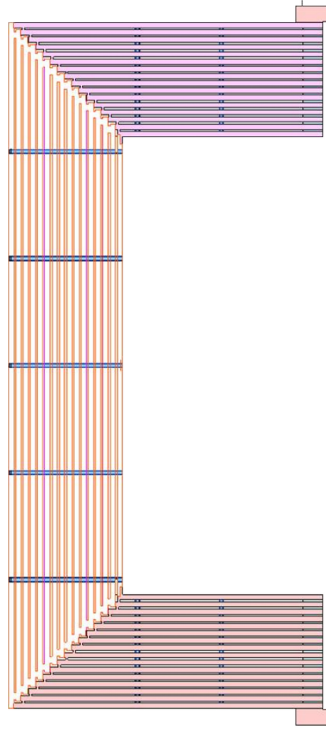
A drawing of the single yoke structure showing bolts holding the iron plates together to form horizontal, vertical and corner subsections [94].
